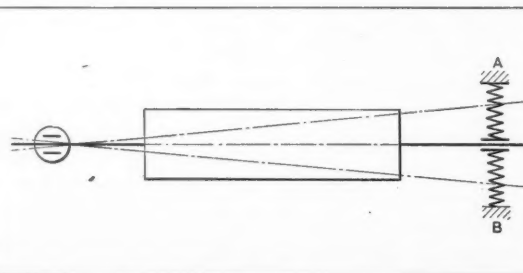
Rotating Body with One Bearing pivoted and One floating between Coil Springs
